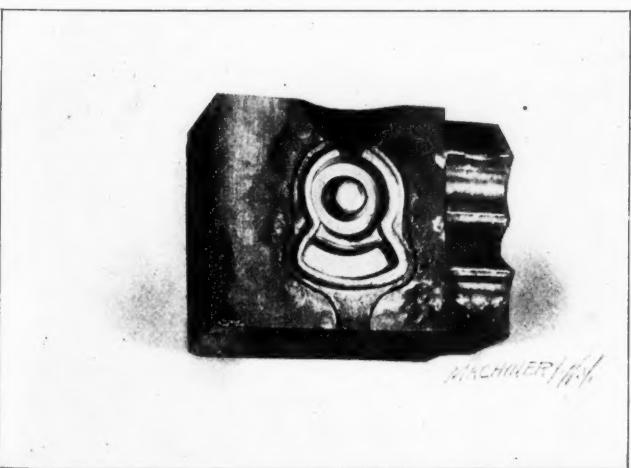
An Example of Drop Forging Die showing Breaking-down Die at the Right.
